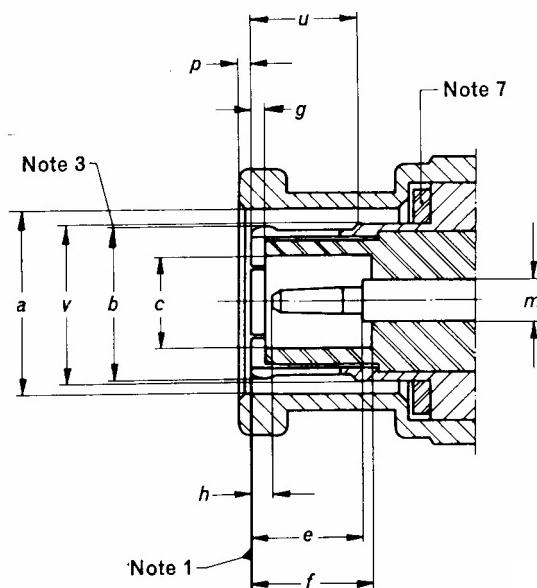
Connector with pin-centre contact (for dimensions, see Table 1)
